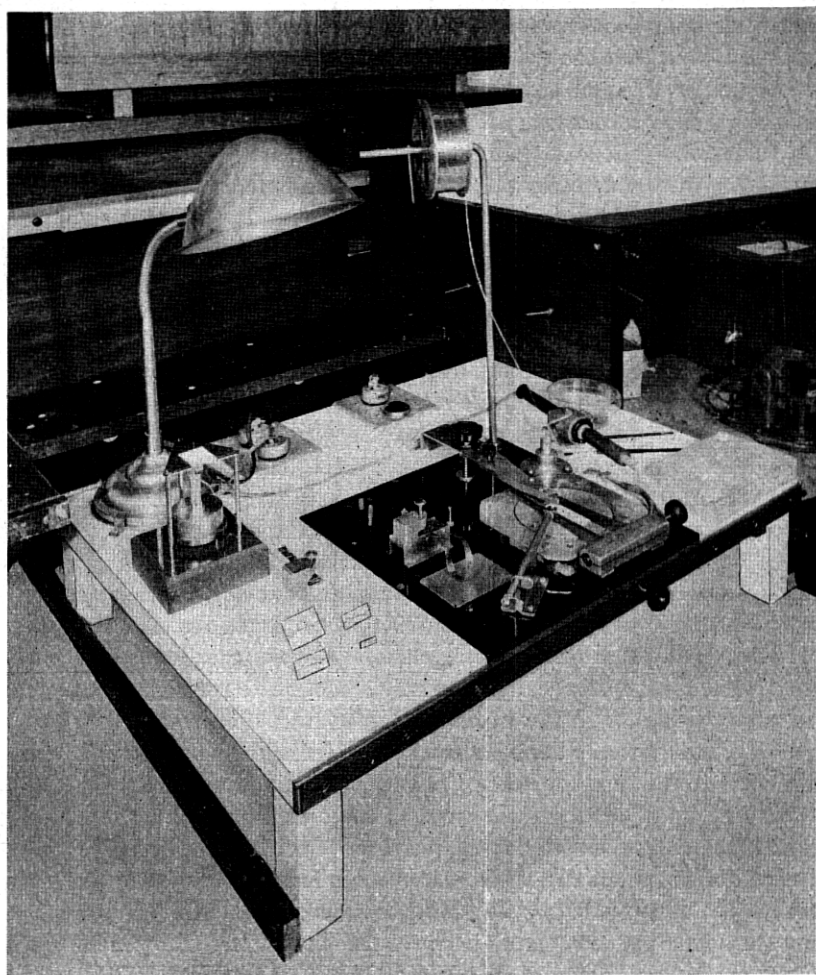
Wire-soldering machine for straight or hooked wires.
